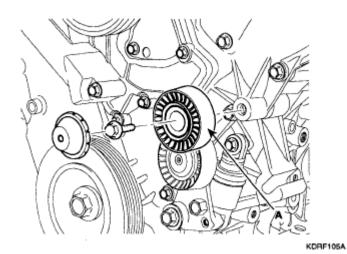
Identifying Drive Belt Idler Courtesy of HYUNDAI MOTOR CO.
